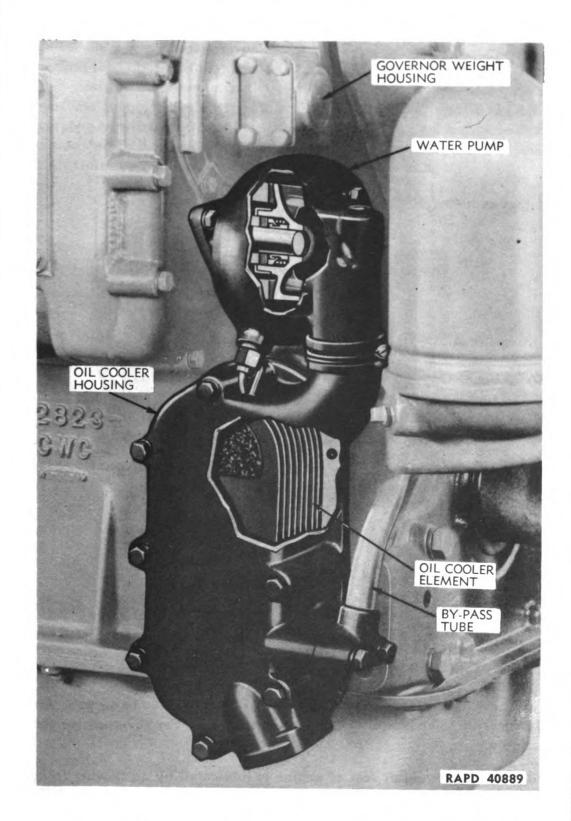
Cut-Away View of Water Pump and Oil Cooler 243
